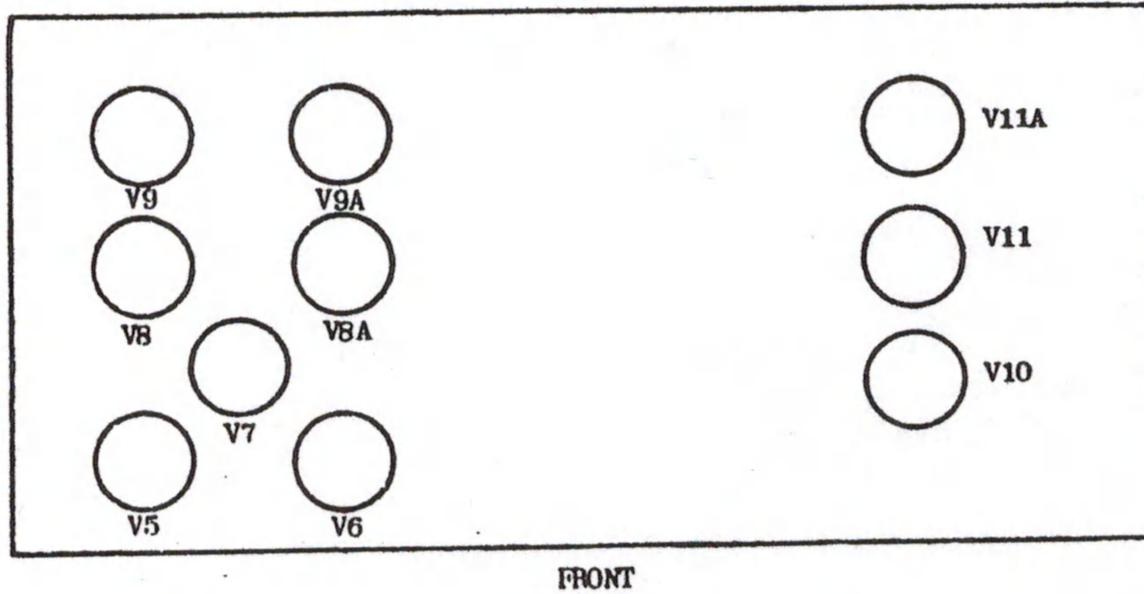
Tube placement diagram-Modulator Chassis. Top view.
